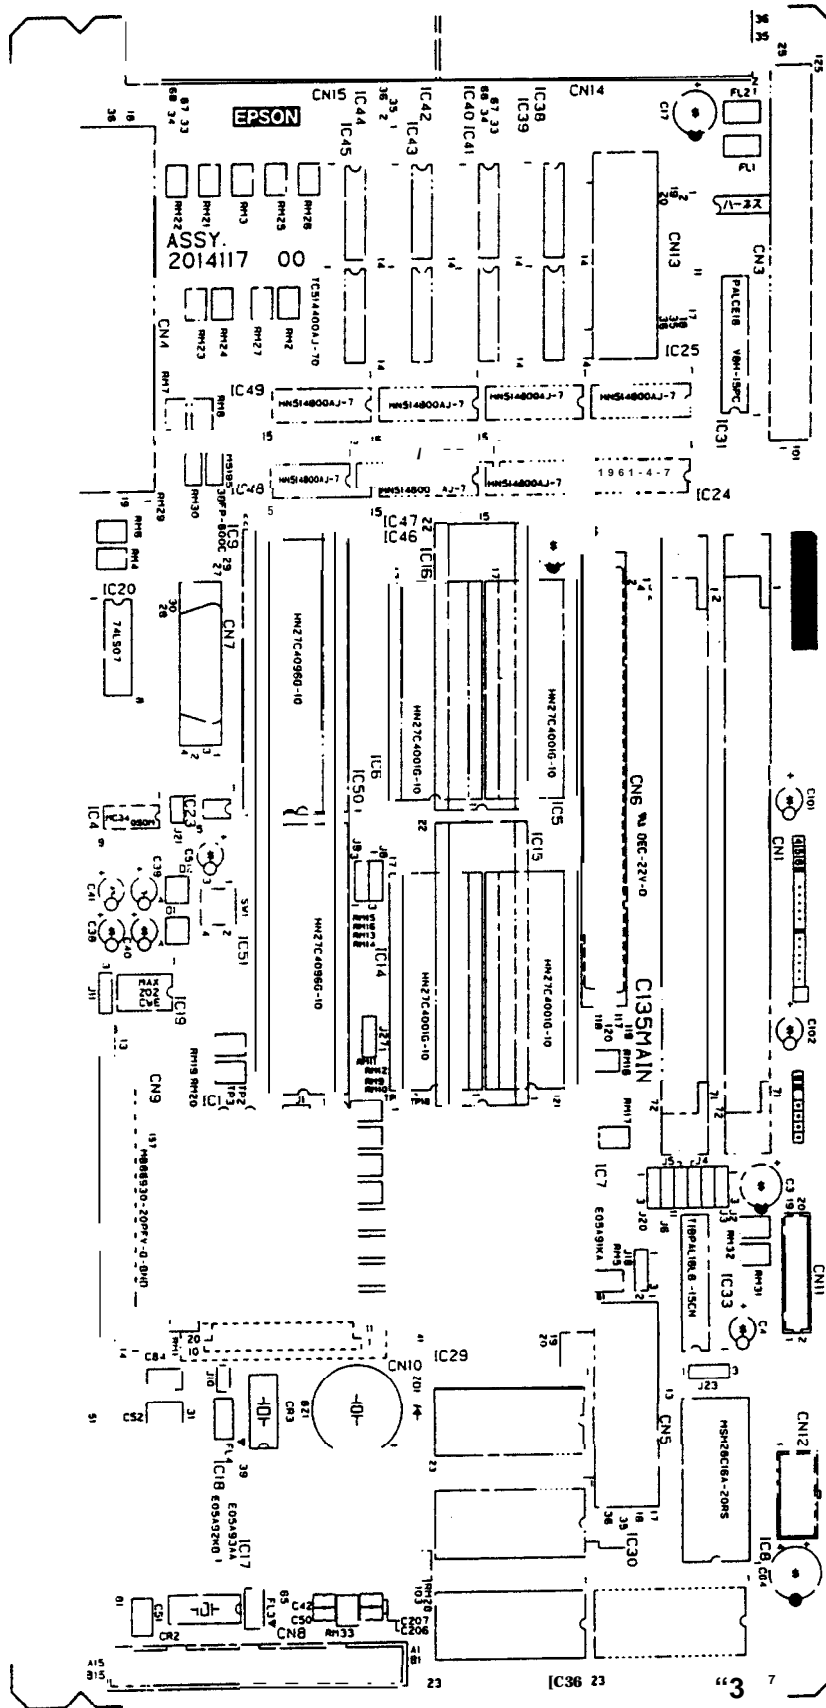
C135 MAIN Board Component Layout (Front Side)
